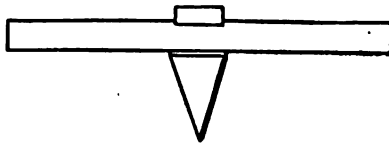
Pipe Reamer for Taking the Burr from Ends of Pipe.
